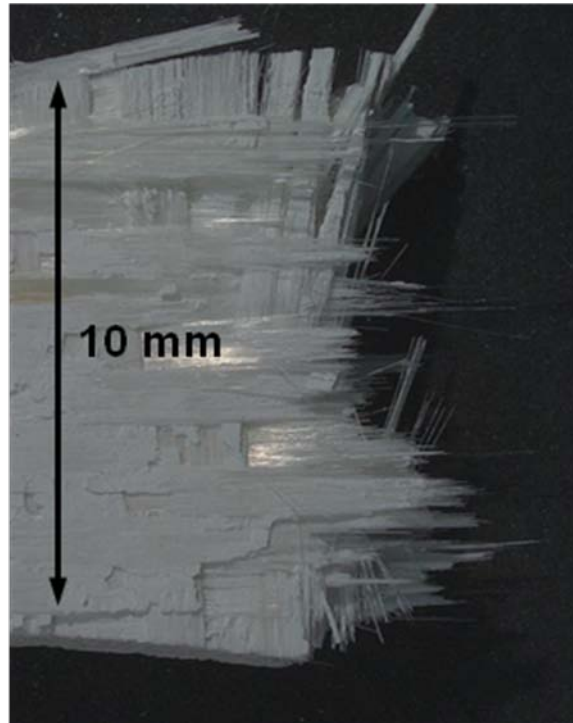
Fracture surface of the N720/AM specimen tested in tension to failure at 1000°C in laboratory air.
